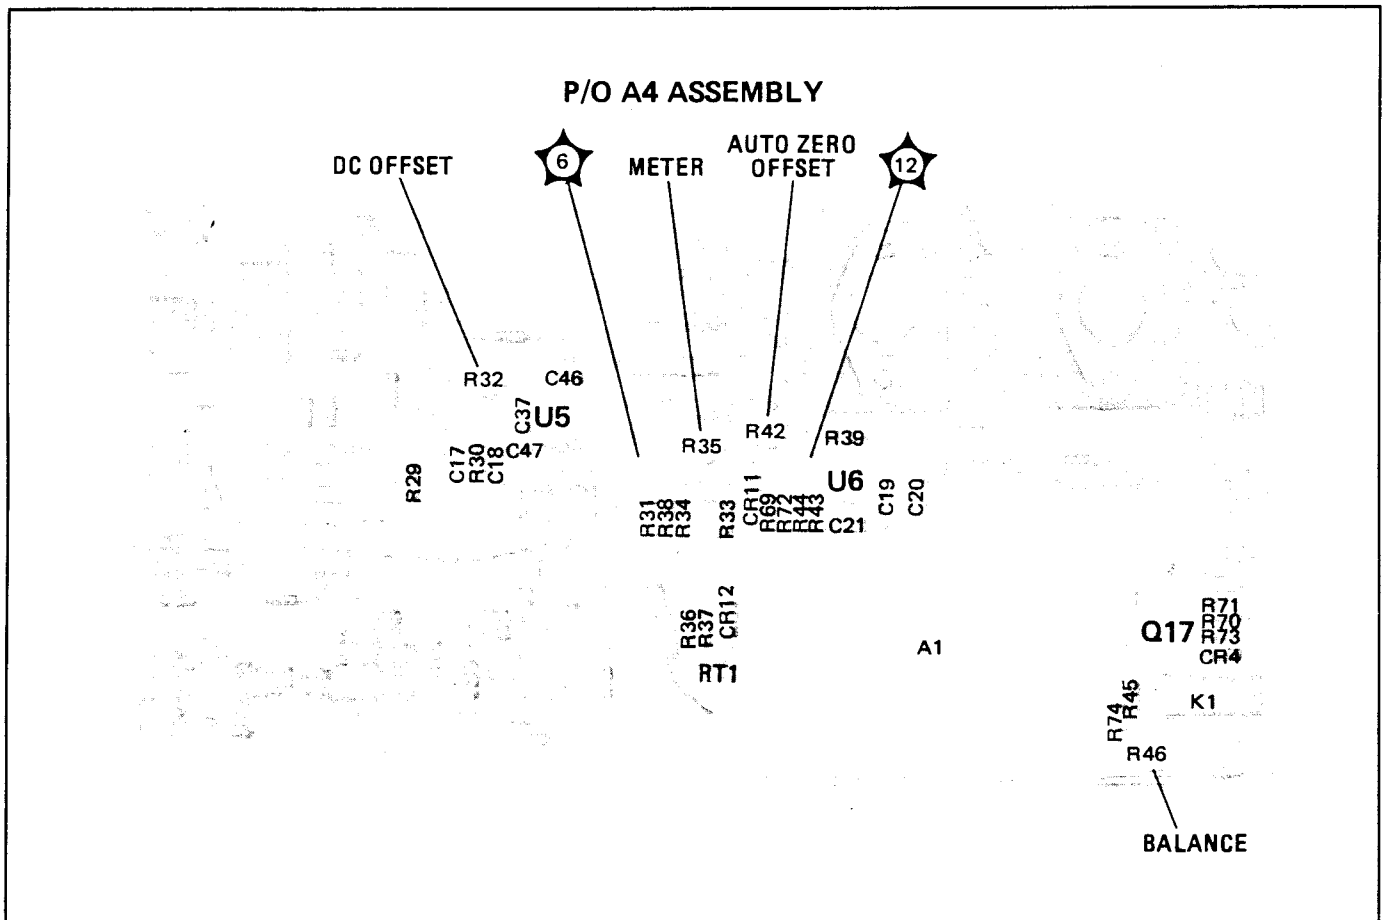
P/O A4 Assembly (DC Ampl/Auto Zero) Component and Test Point Locations
